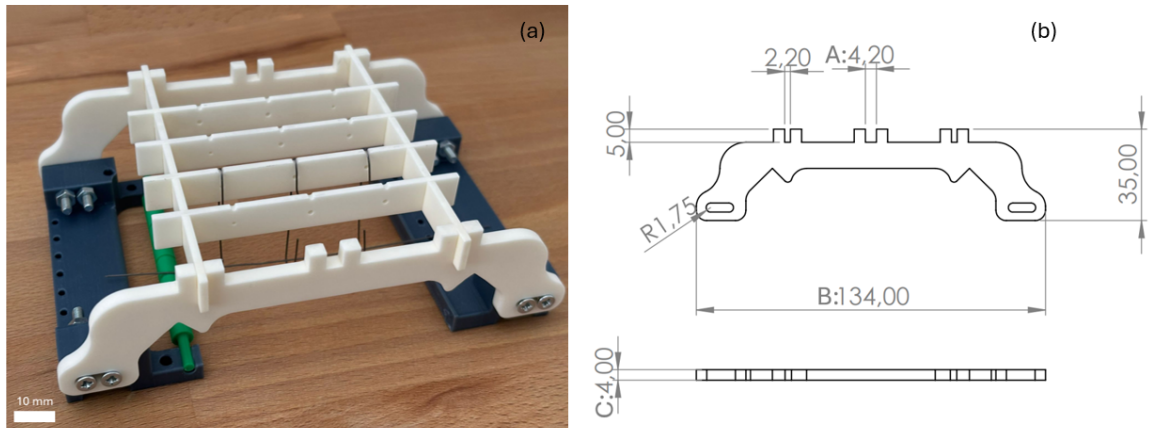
Tungsten loop clamping device. (a) shows a picture of the assembled alumina 99.7% parts, (b) a schematic drawing of the couple beam
